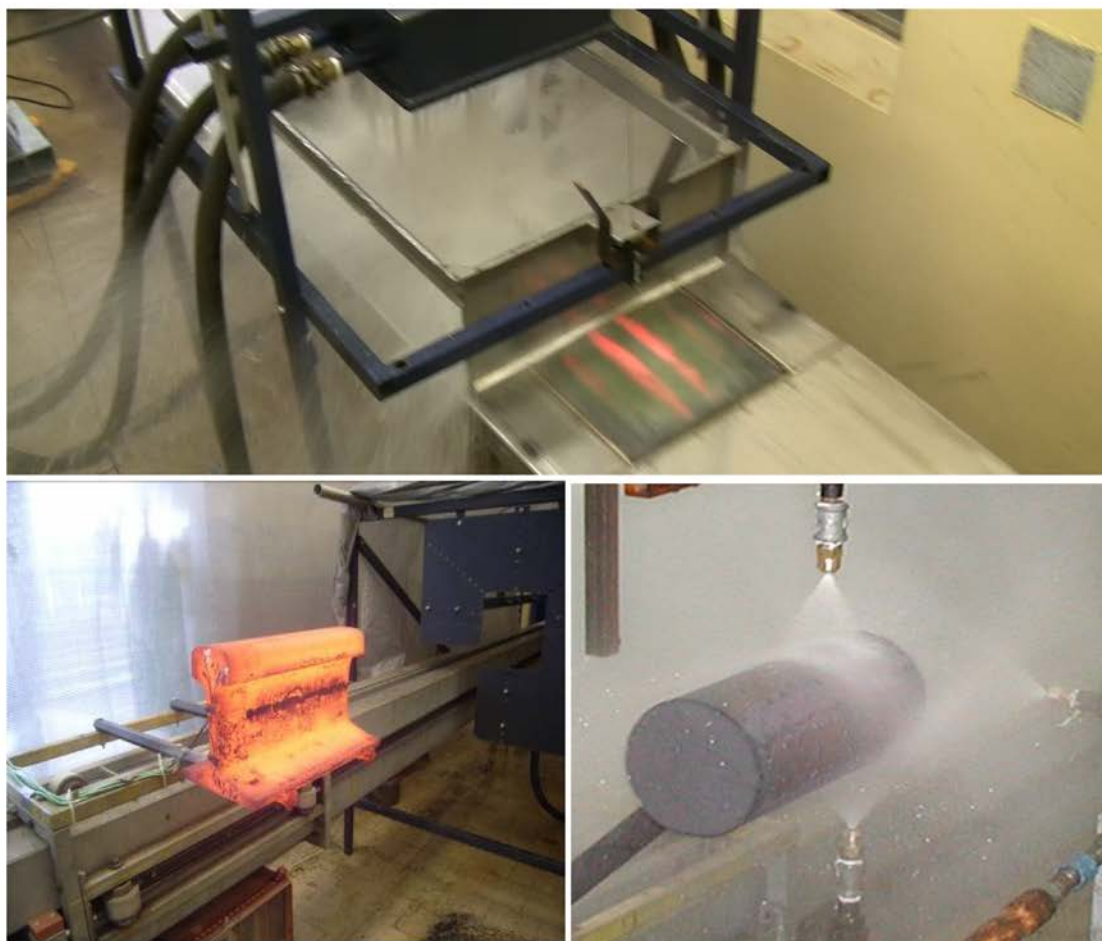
Examples of boundary conditions measurements on steel plate, rail, and pipe.
